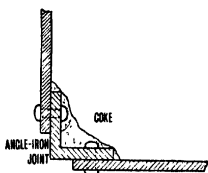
Angle Method of joining Bottom of Still to Shell.
